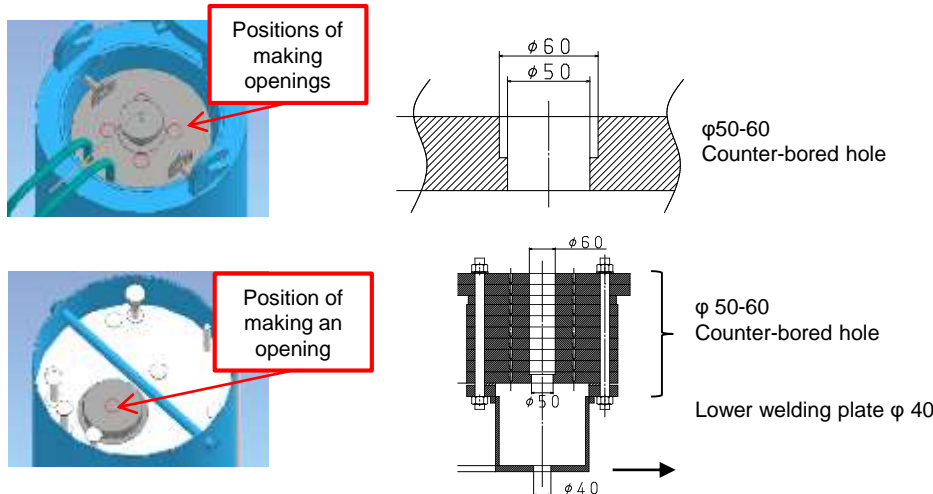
Positions of making openings and openings sectional view (Above: KURION adsorption tower, Below: SARRY adsorption tower)
